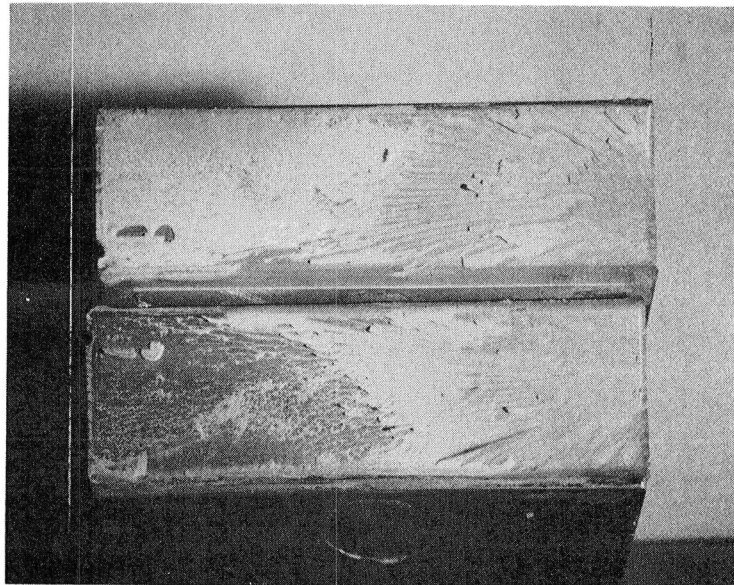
PHOTOGRAPH OF A TYPICAL FAILURE SURFACE OF AN ALUMINUM SCARF JOINT. VIEW IS PERPENDICULAR TO SURFACE. (SPECIMEN AS-5)
